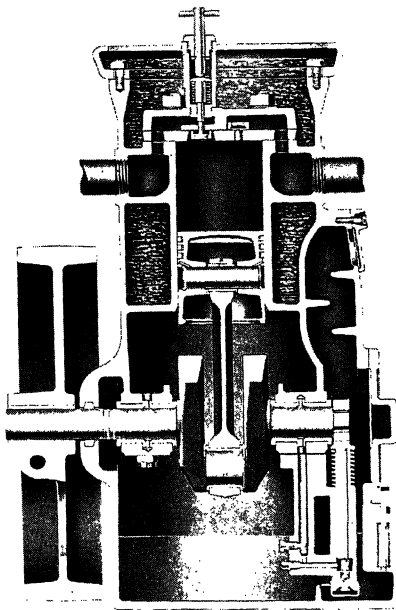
Circulation-oiled, water-cooled, single-stage air compressor. (Courtesy Worthington Pump and Machinery Corp.)
